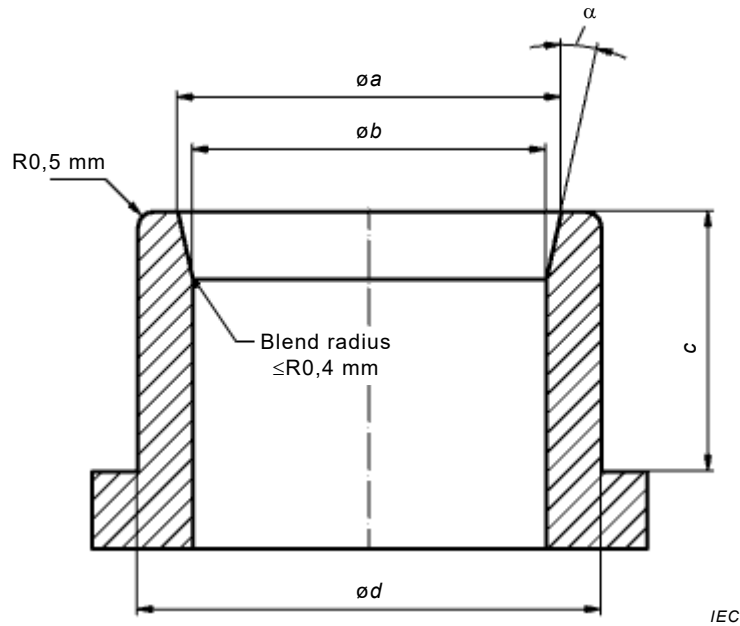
Gauge rings for socket outer contact (for dimensions see Table 4)
